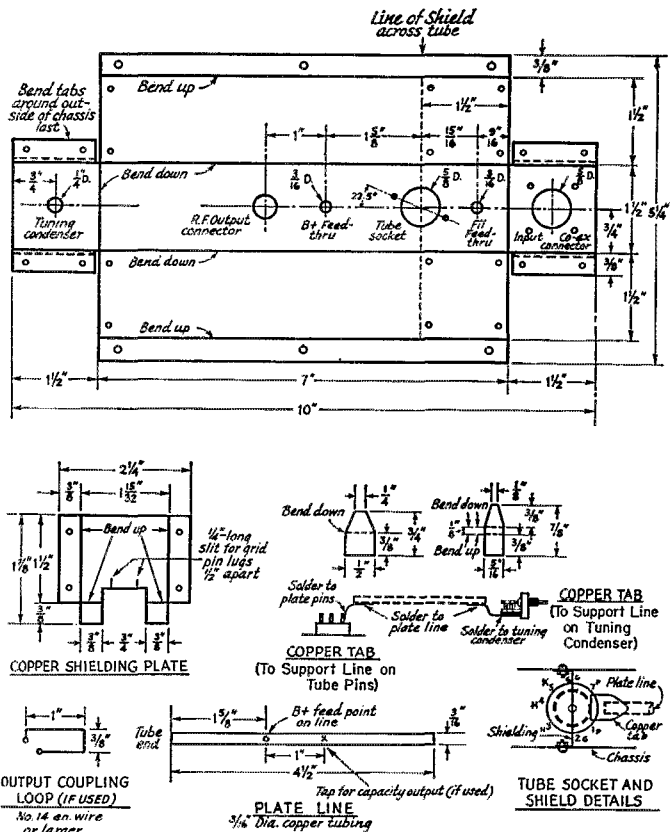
Detail drawing of the chassis and small metal parts used in the 6AN4 r.f. amplifier. All sheet-metal parts may be made of flashing copper.
